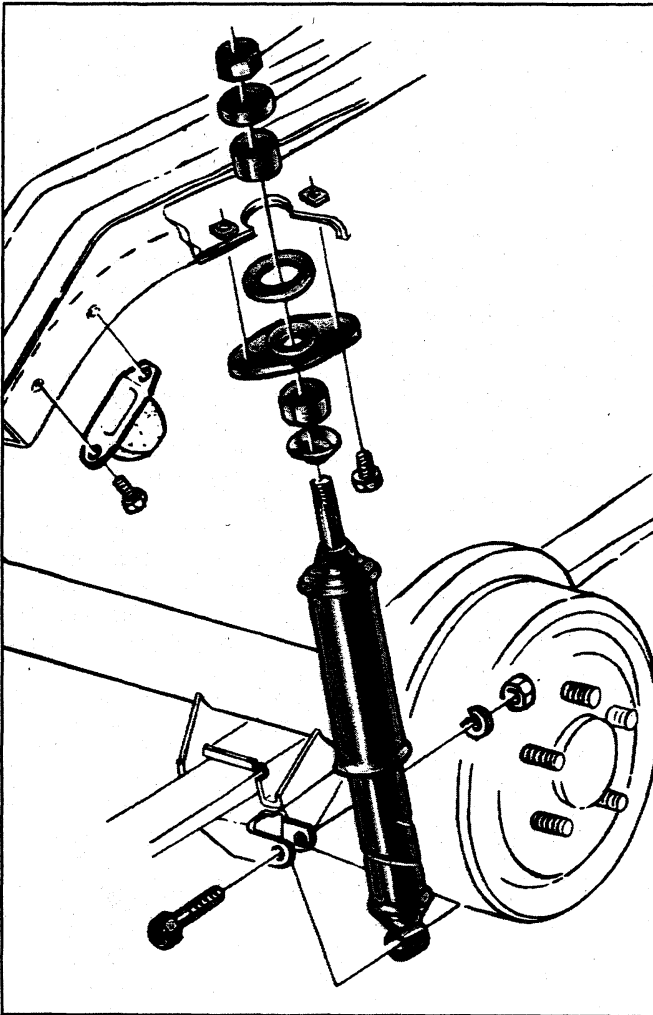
Shock Absorber Mounting—Exploded View (Camaro)
